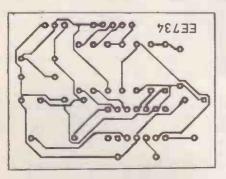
Component layout and full size copper foil master pattern for the 8038 Oscillator Module
